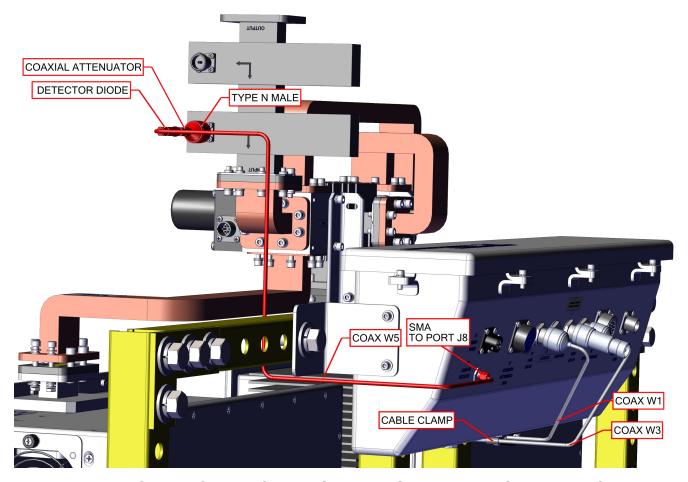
Coaxial Cables, C-Band Systems (Signal Box to Crossguide Coupler)
